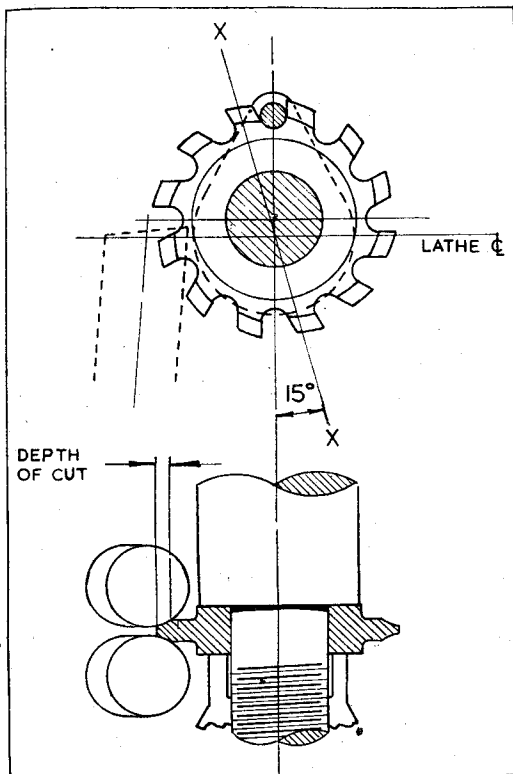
View showing mounting of cutter and relation to forming pins. Note axis XX coincides with axis XX in linkage view
